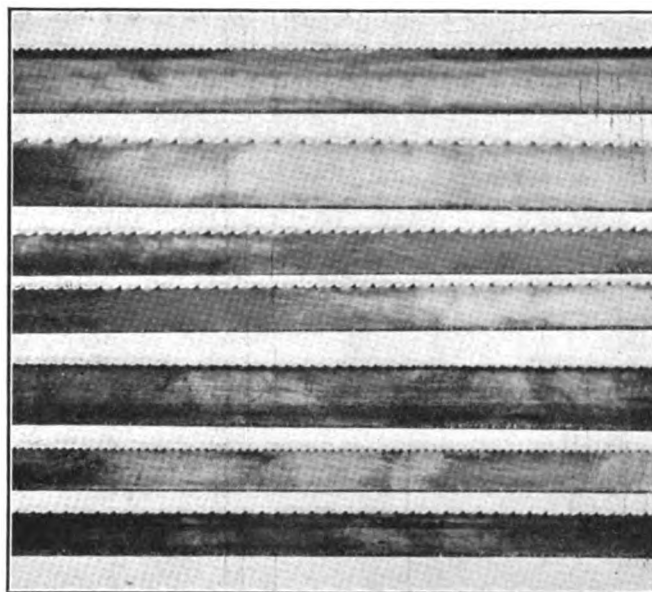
SAMPLE SECTIONS OF METAL-CUTTING SAWS
